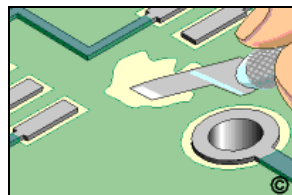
Scrape away damaged base board material with a Knife or Micro-Drill.
